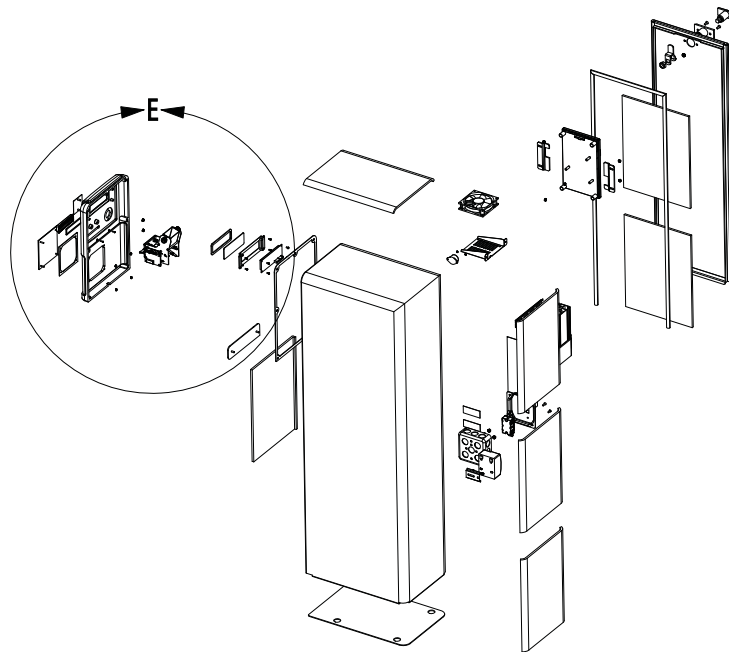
Barcode Exit Verifier (220VAC) Drawing, Detail E
